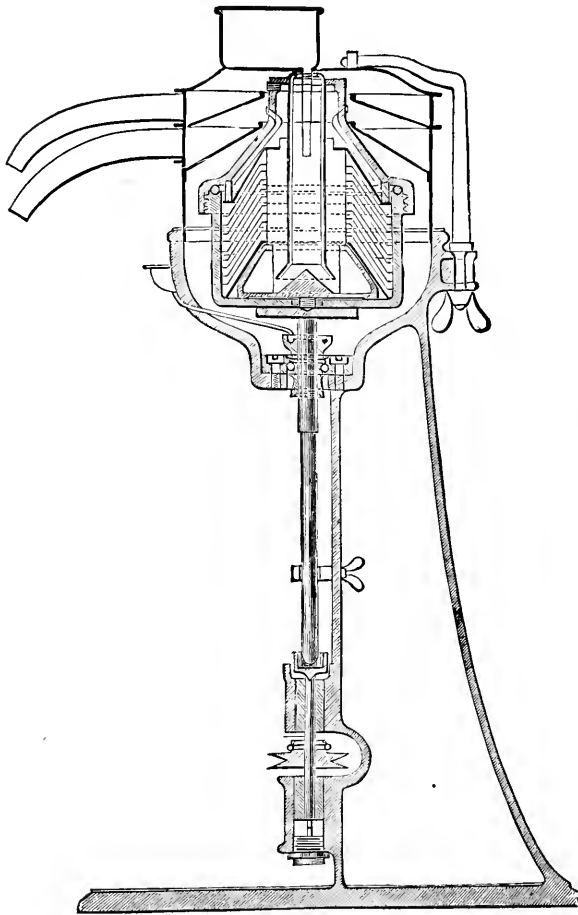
Alpha Separator No. 1. (Perpendicular Section.)
